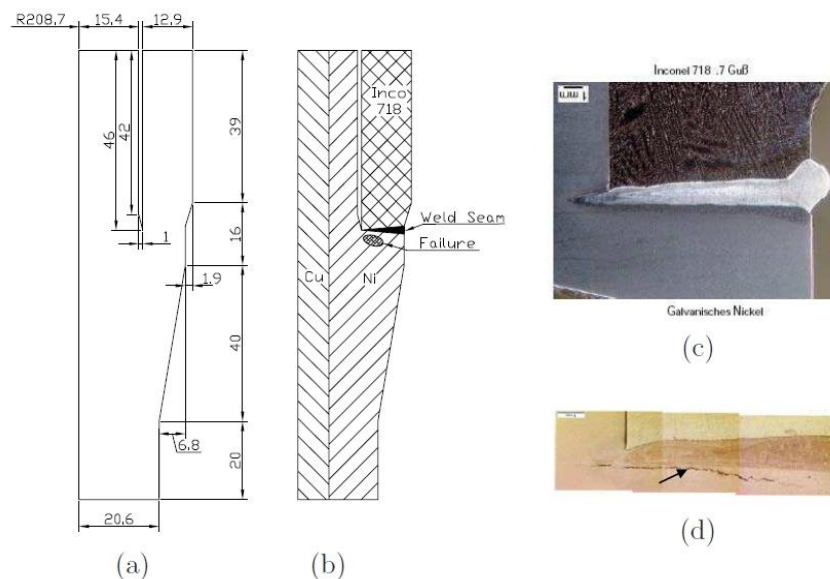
Problem description. (a) geometry, (b) cross section, (c) weld seam, (d) failure.
